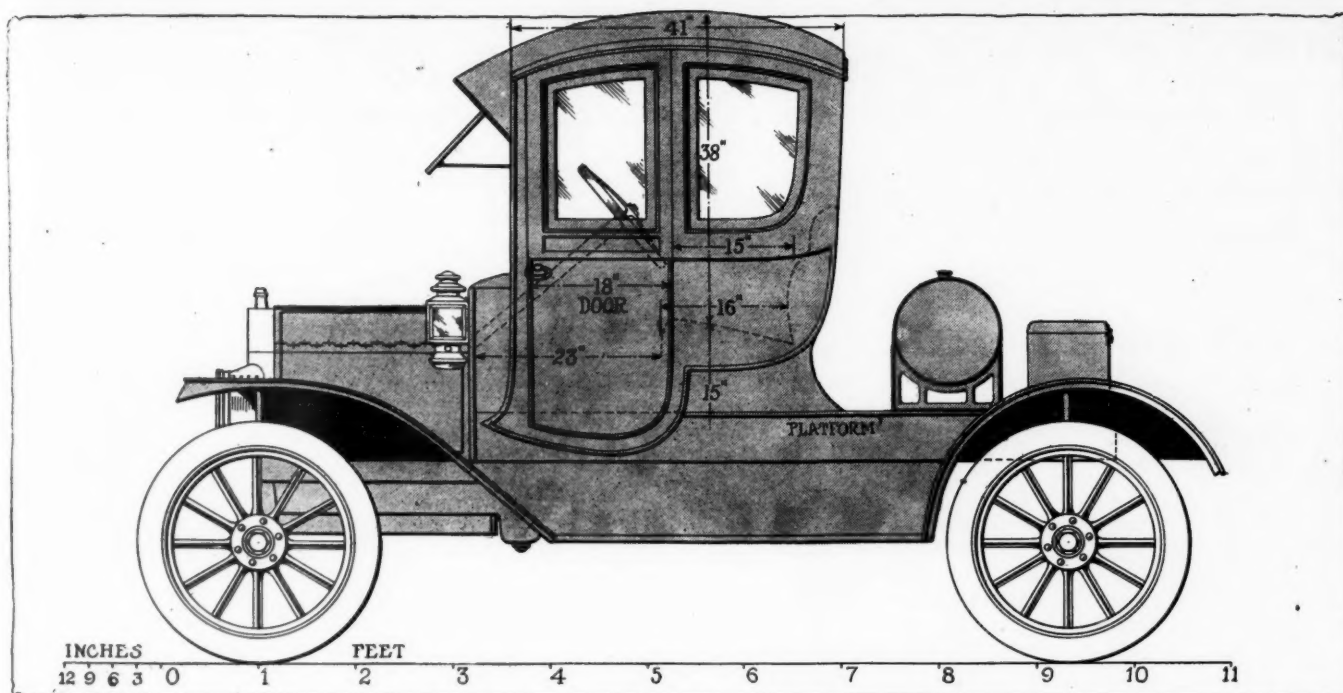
Side elevation of coupe body mounted on platform of Ford runabout
